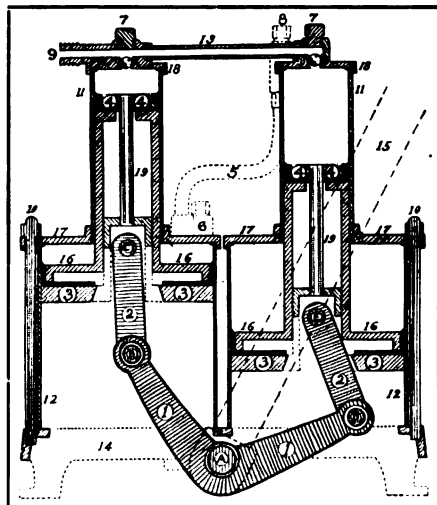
Sectional View of Globe Tire Pump Showing Stages of Compression.
